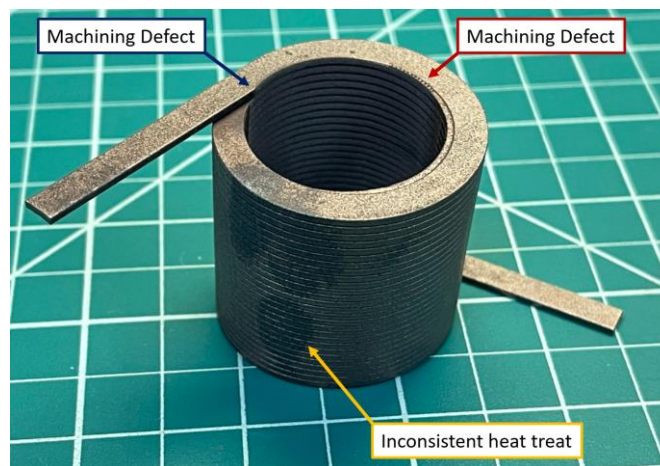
Defects upon inspection of a spring from AM Vendor 2.
